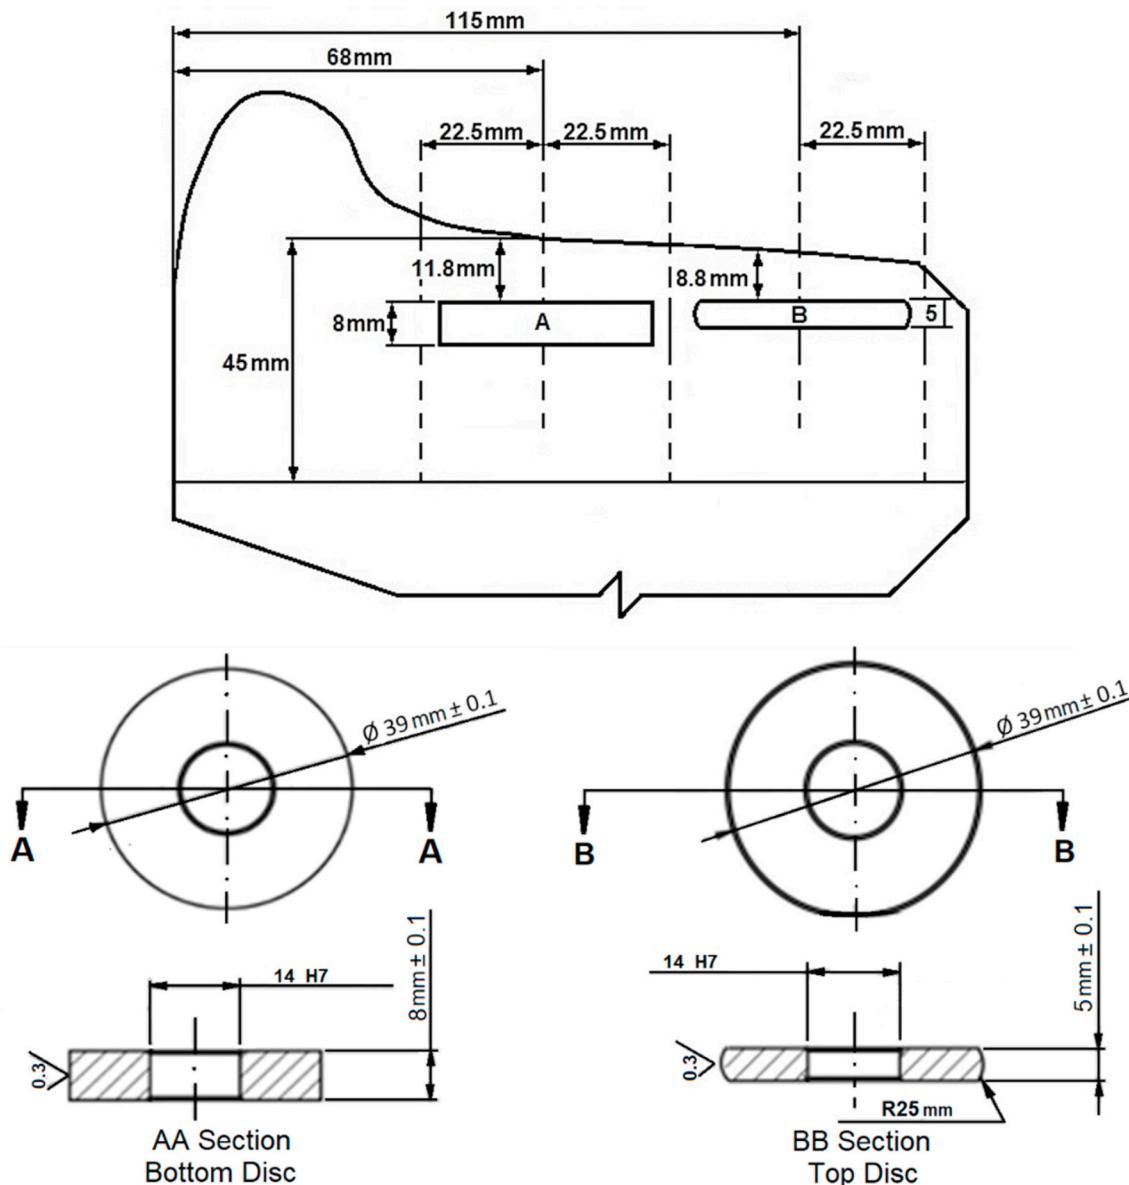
a) Position in the wheel from which the discs were removed (in millimeters); b) Dimension of the discs used in the twin-disc tribometer (in millimeters).
